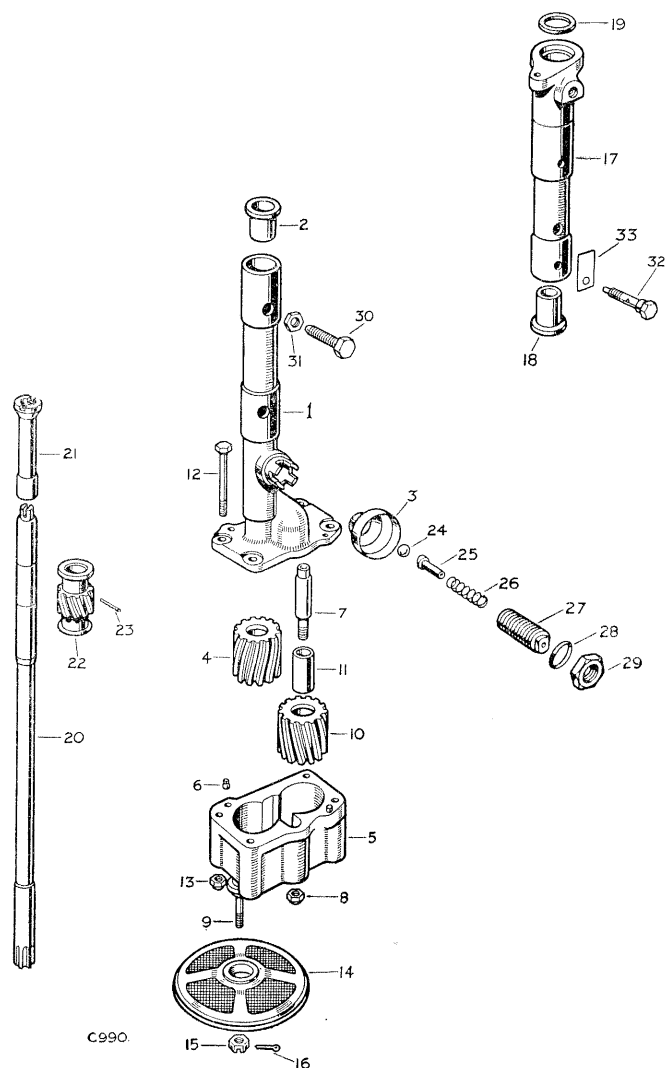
Exploded view of oil pump and driving gear, 2 litre Petrol
